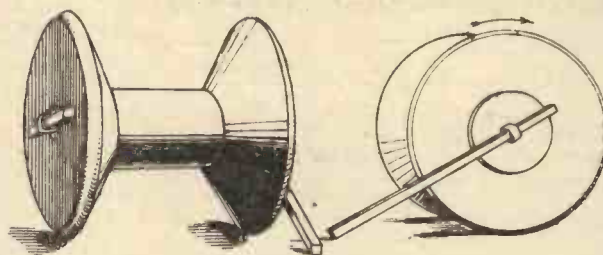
Details of the rubber motor used for driving these simple cardboard models.
